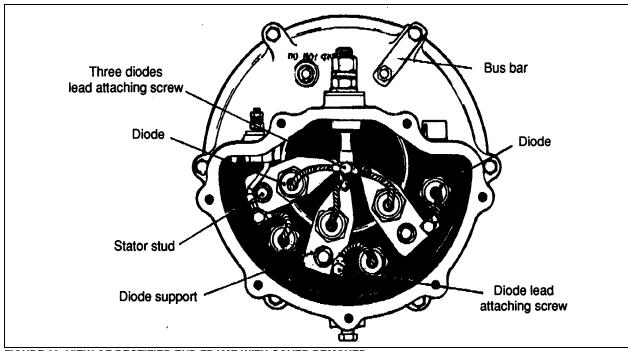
VIEW OF RECTIFIER END FRAME WITH COVER REMOVED
